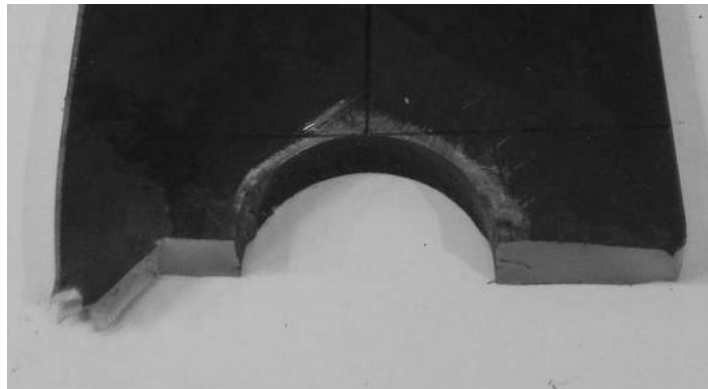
Fracture surfaces of welded specimens (W₃ specimen).
